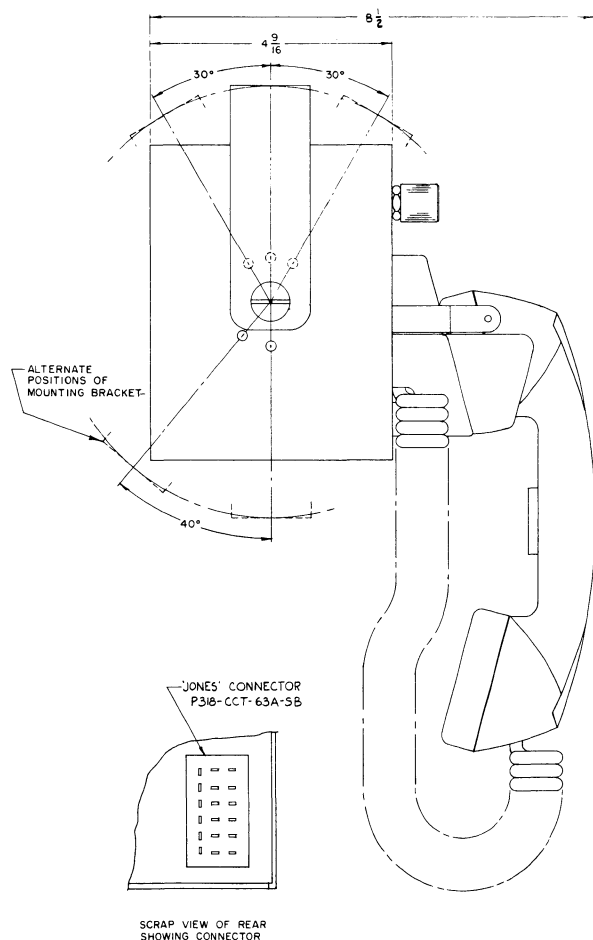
Control Unit 48B2-SW, Outline and Mounting Dimensions
